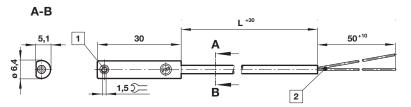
/LSU/*V, M/50/LSU/5U, TM/50/RAU/2S Cable length L = 2, 5 or 10 m
